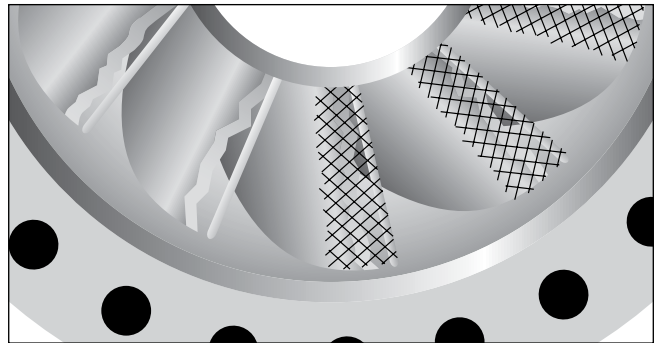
Expanded metal, used over damaged blades, rebuilds and reinforces the repair area
